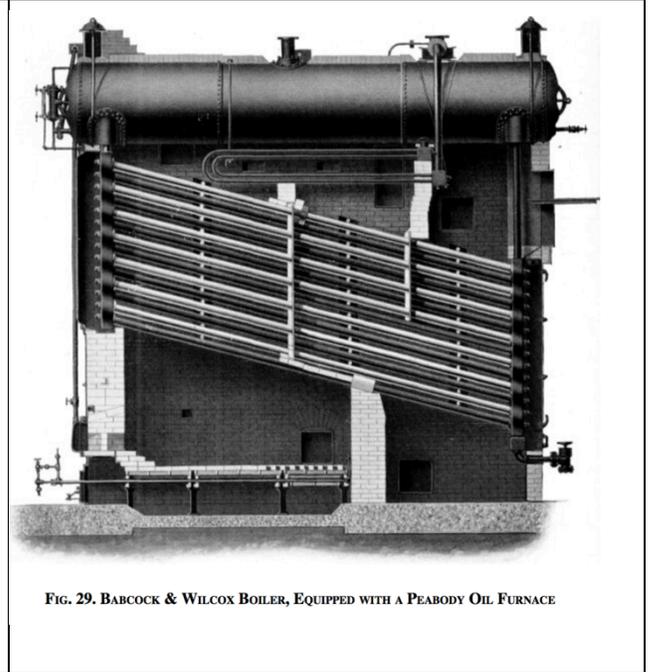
BABCOCK & WILCOX BOILER, EQUIPPED WITH A PEABODY OIL FURNACE
